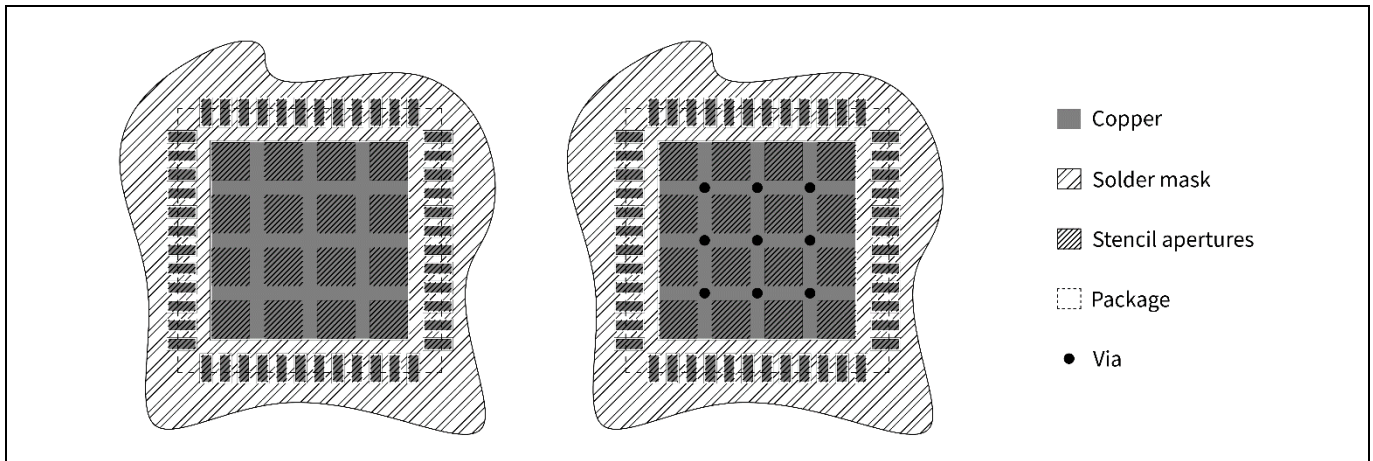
Examples of solder mask defined footprint variants without (left) and with (right) via-in-pad design. The segmentation of the stencil is combined with the via positioning.
